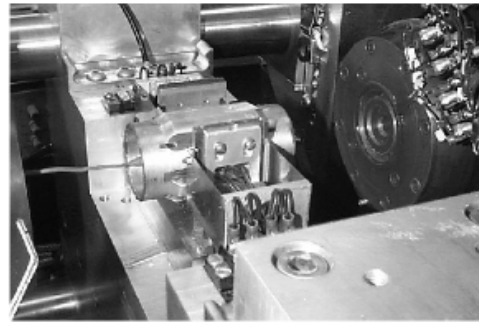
Shaker moving element and right magnet showing center port for laser beam access
